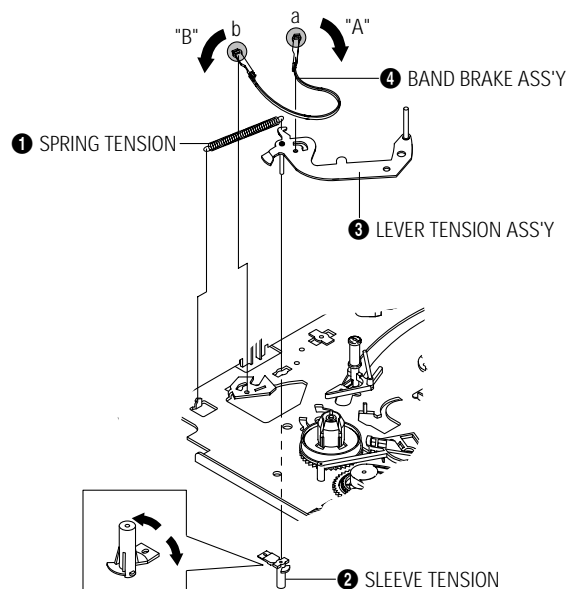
Lever Tension Ass'y, Band Brake Ass'y, Sleeve Tension Removal
